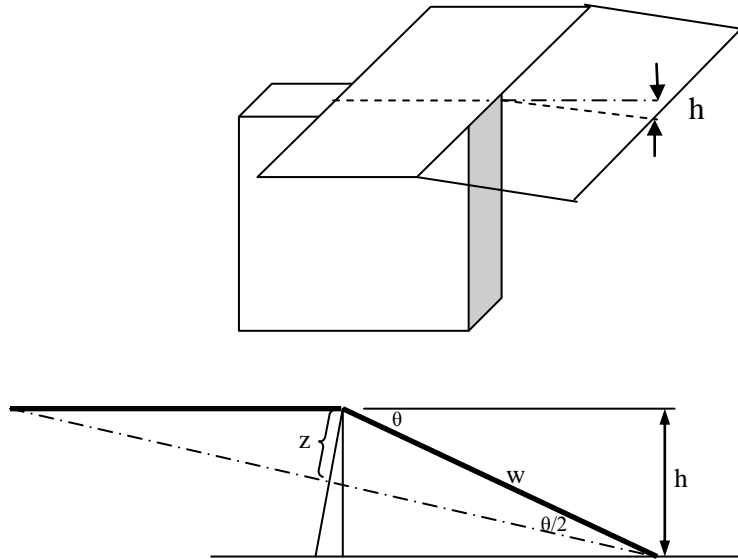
Schematic image of measuring the deflection in the weld joint.
